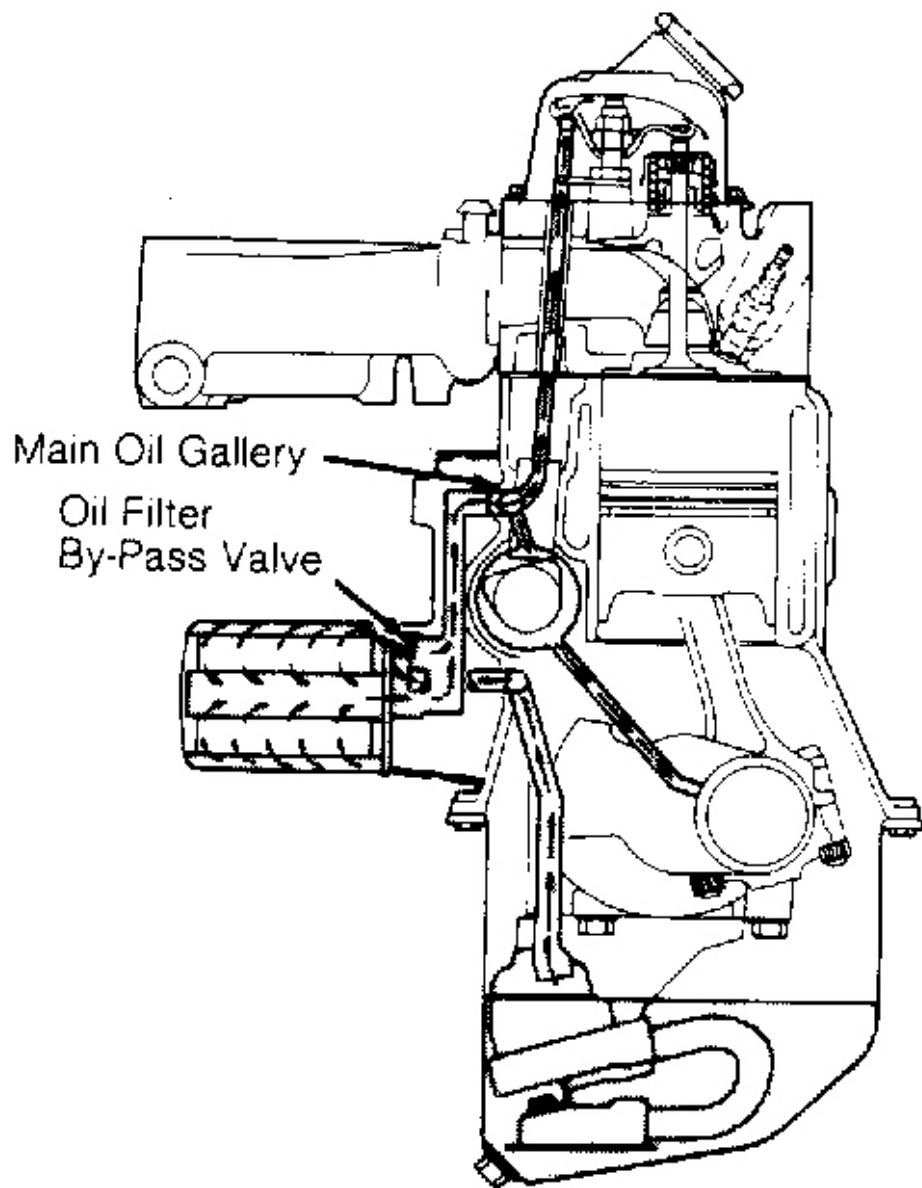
Cross-Sectional View Of Engine Oil Circuit
